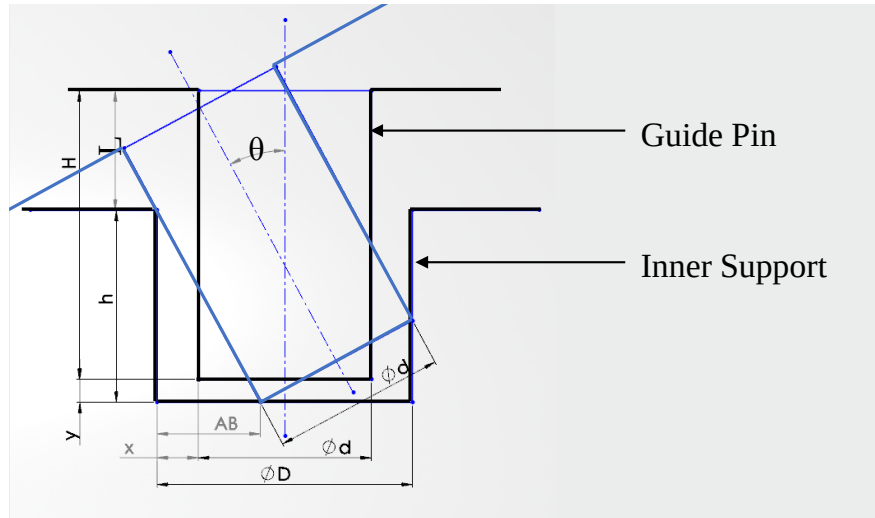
Deciding the clearance between the inner support and the guide pin.
